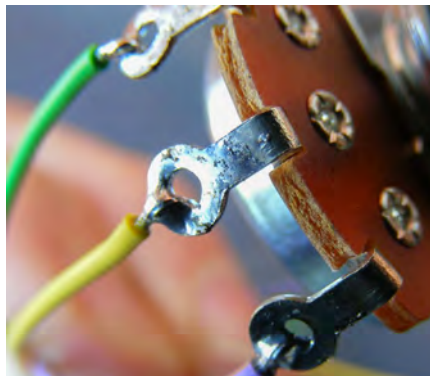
Soldering to tag on pot. Leaving a hole is not a problem and can be used to attach more wires.
